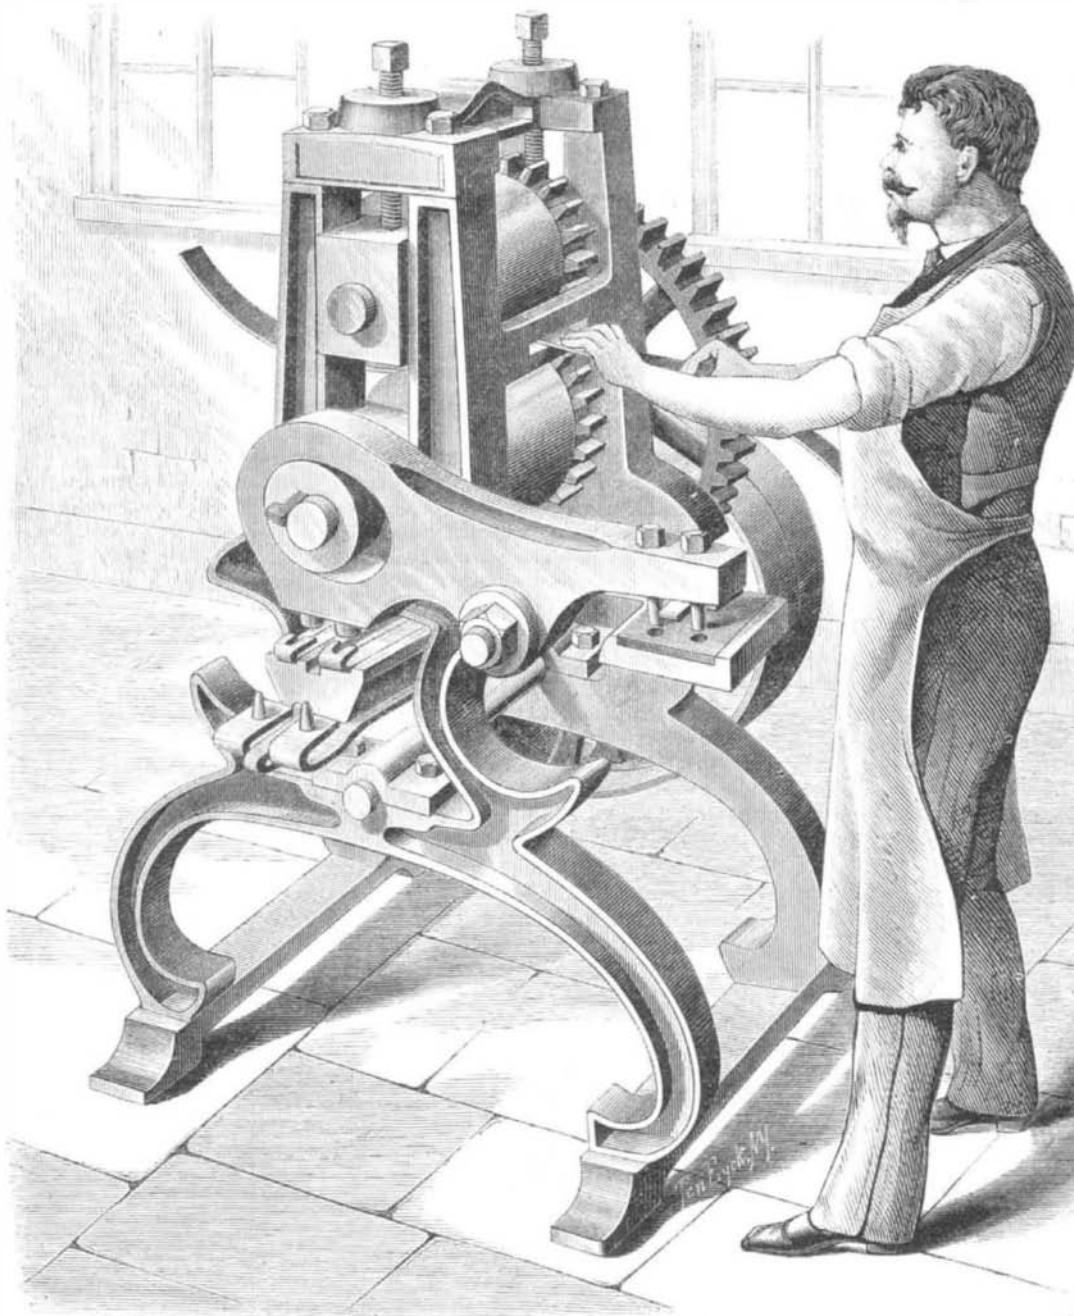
MACHINE FOR BENDING THE BARREL HOOPS.
